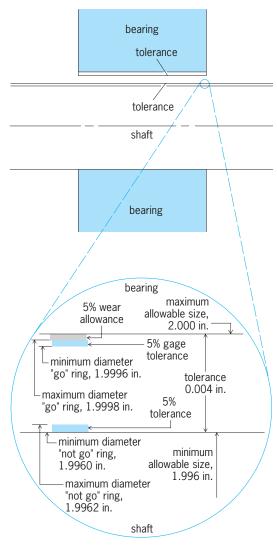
Makeup of gage tolerances. 1 in. = 2.5 cm.
